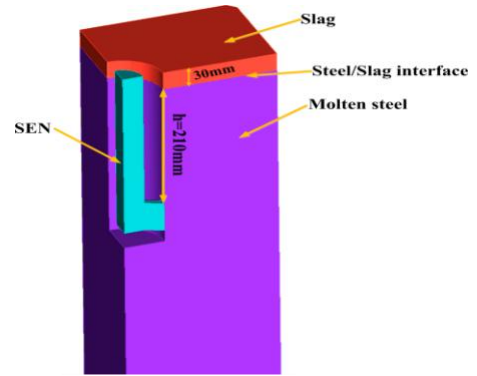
geometry of casting mold (top view and front view) A. Model assumption
